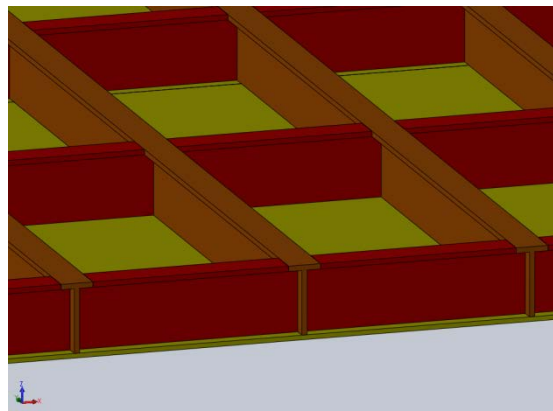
Steel Plate and “T” Beam Stiffener Configuration
